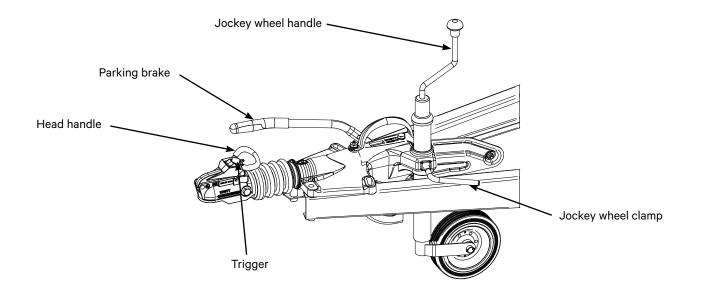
General arrangement of the trailer towing hitch (showing a ball type coupling)
